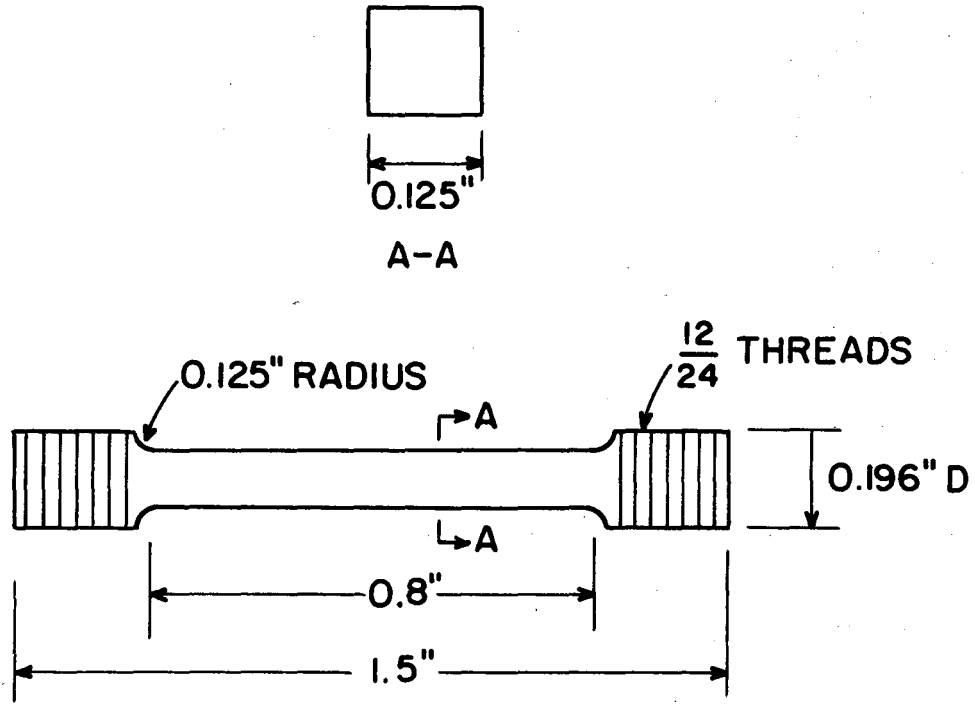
DIMENSIONS OF THE SPECIMEN.
